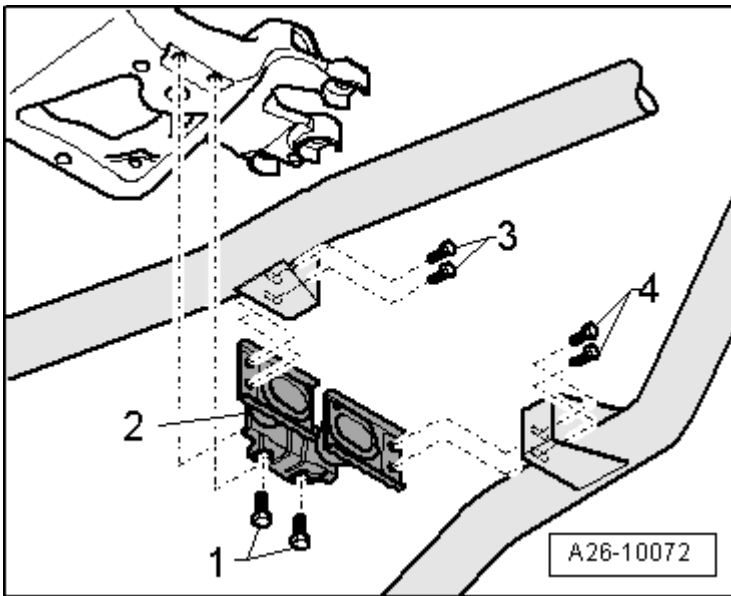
Individual Components Of Center Bracket Mounting For Front Exhaust Pipe
